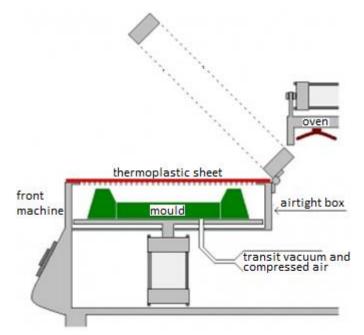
An example of a vacuum forming machine (Agulon Kunststoffen, n.d.)
